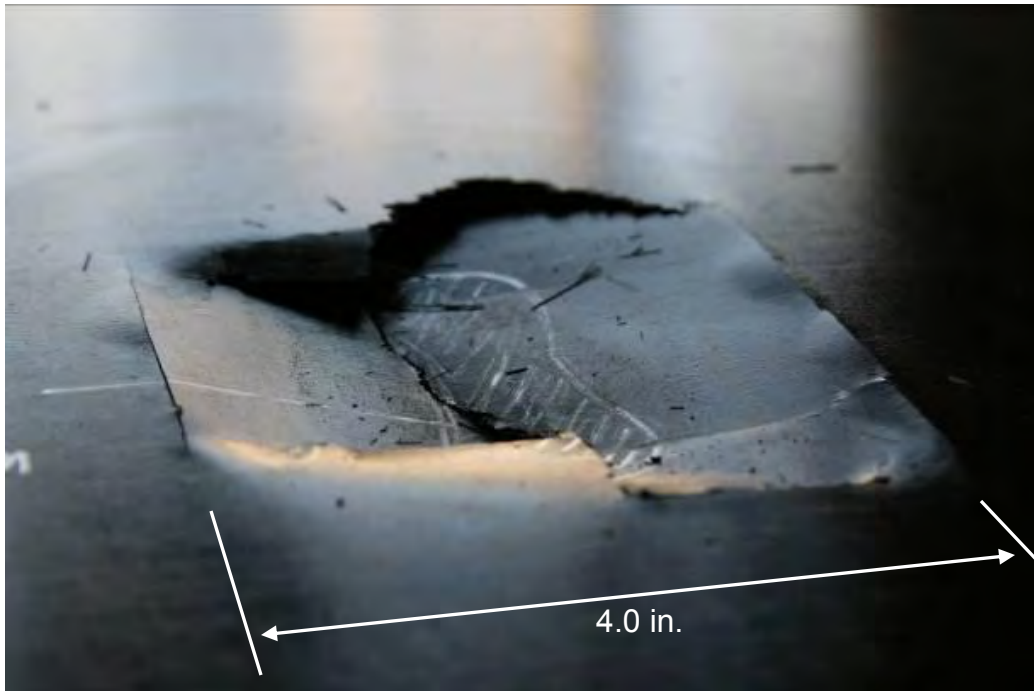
Stringer00 after Final Failure Following 2nd Loading; Initial Peanut Shaped Delamination is Indicated by the Hatch Pattern Zone; Straight Cracks on Left and Right Sides of Photo Spaced at 4 in. Define Stringer Inside Flange Edges
